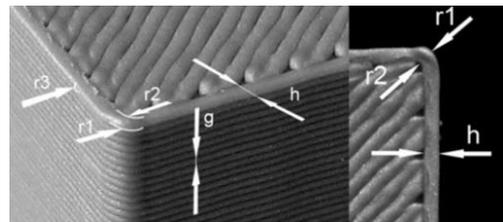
Illustration of internal error; h - width of single material thread, r1 and r2 - external and internal radius of real model corner, g - layer thickness, r3 - radius of material thread rounding.
